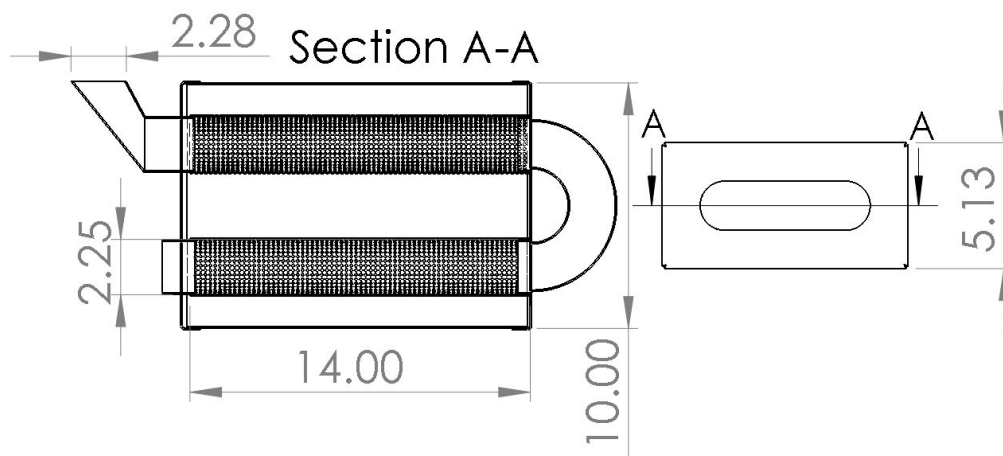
Specific dimensions include a 14x10x5in. Cavity with 2.25in. inlet and outlet pipes.
